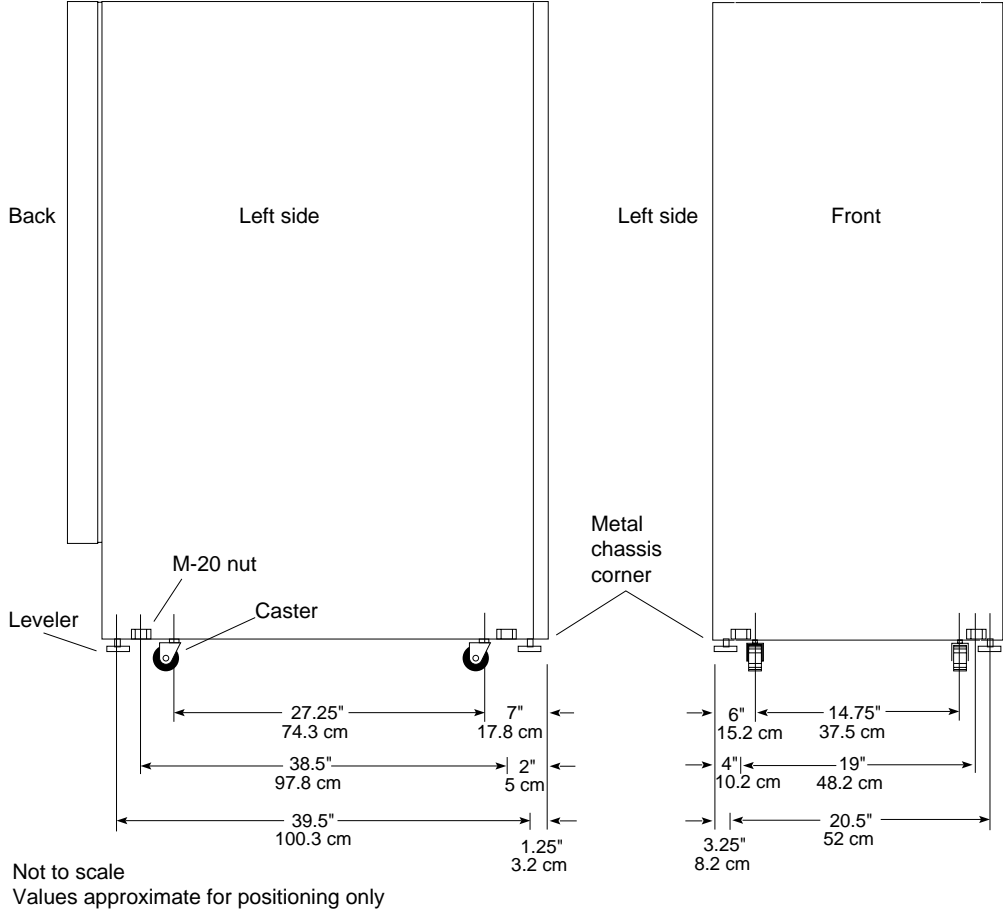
Challenge Rackmount Caster and Leveler Locations
